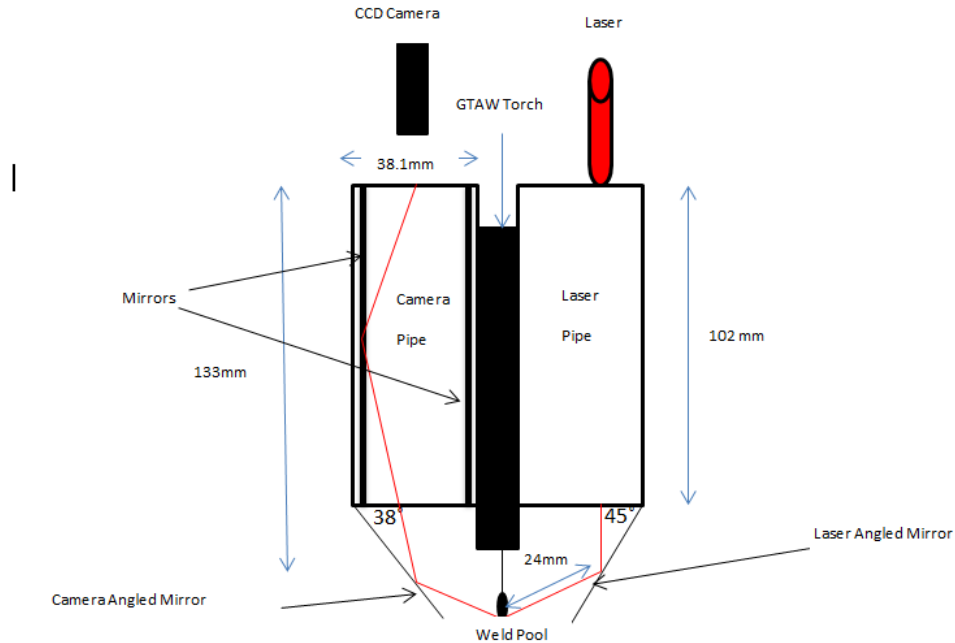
, Close Up of Compact Vision System Fixture, Front View
